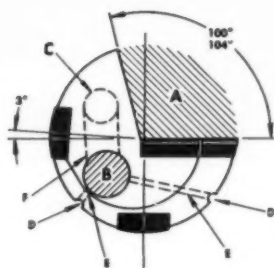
Carbide drill to show the 100°-104° included angle for the flute.
